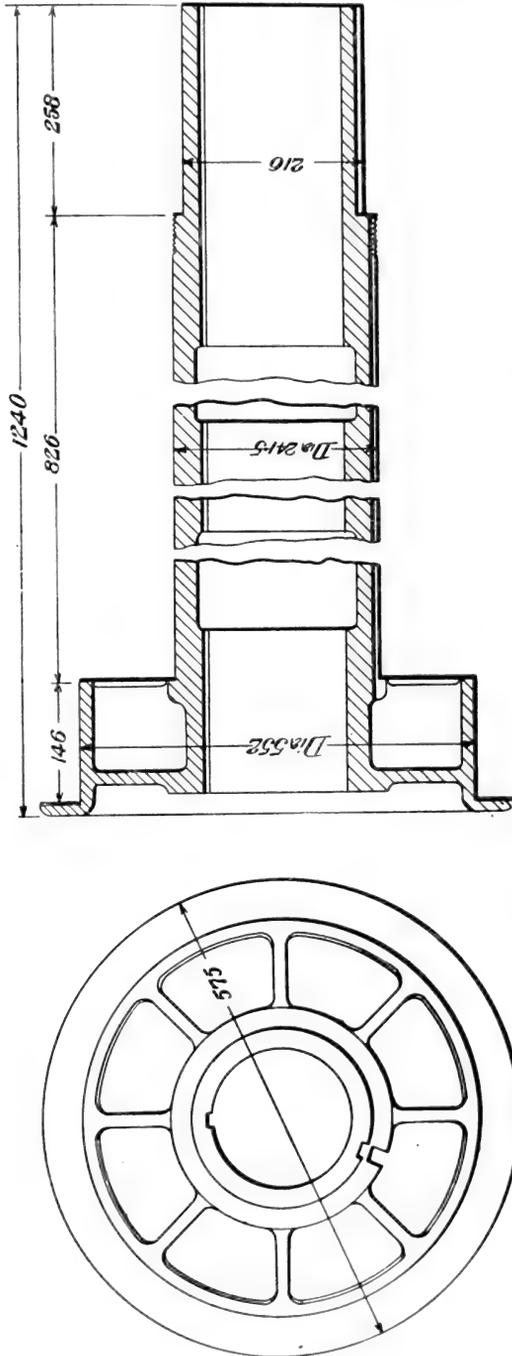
Armature Sleeve of 117 h. p. Gearless Railway Motor.
